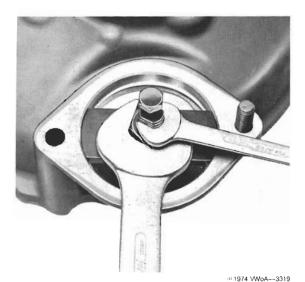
Starter drive bushing being removed from the clutch housing with puller VW 228b.
